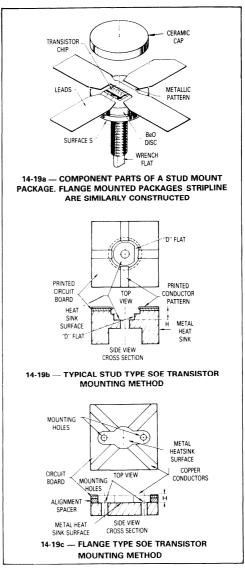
MOUNTING DETAILS FOR SOE TRANSISTORS
